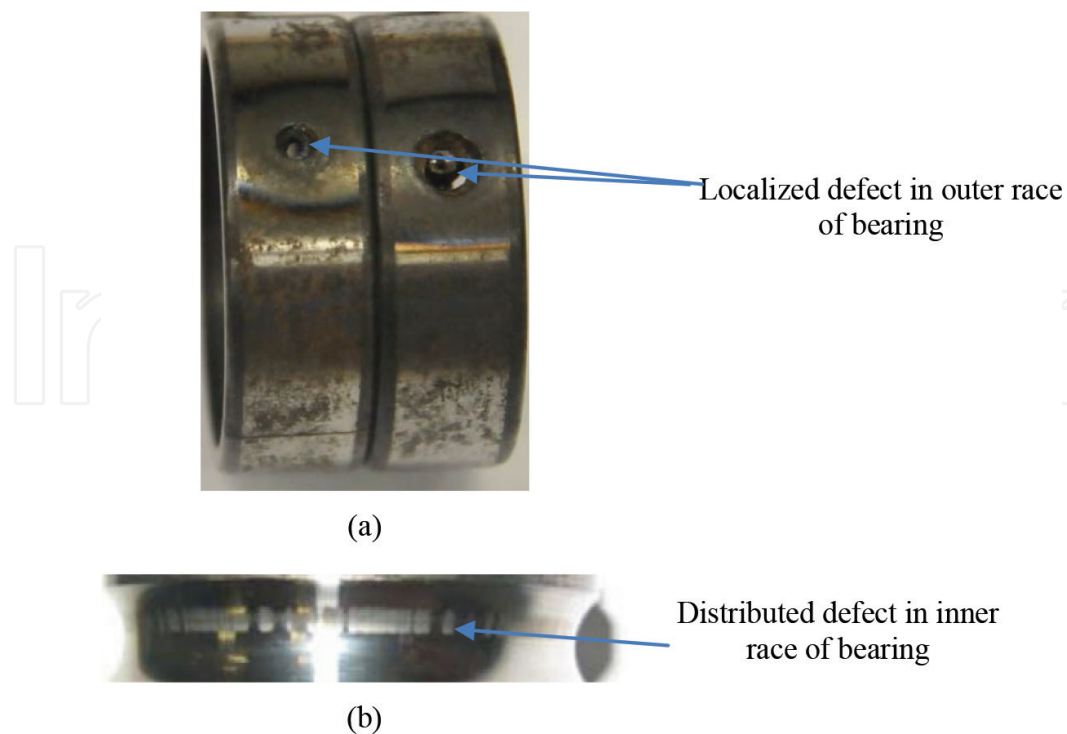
Example of bearing (a) localized defects and (b) distributed defects.
